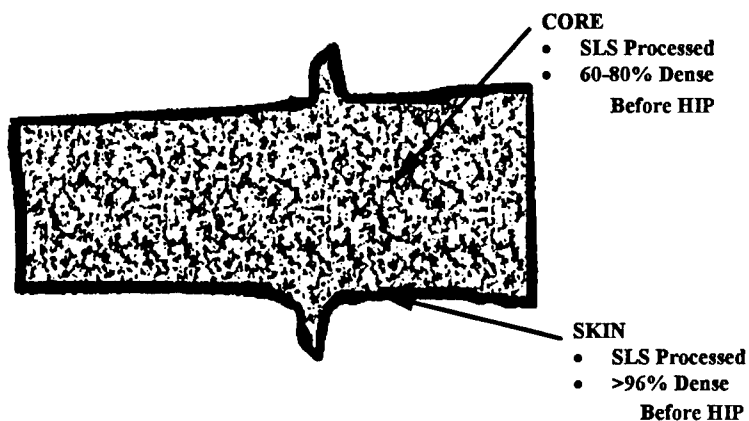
Selective Laser Sintering Component Concept for Powder Metal HIP Parts
